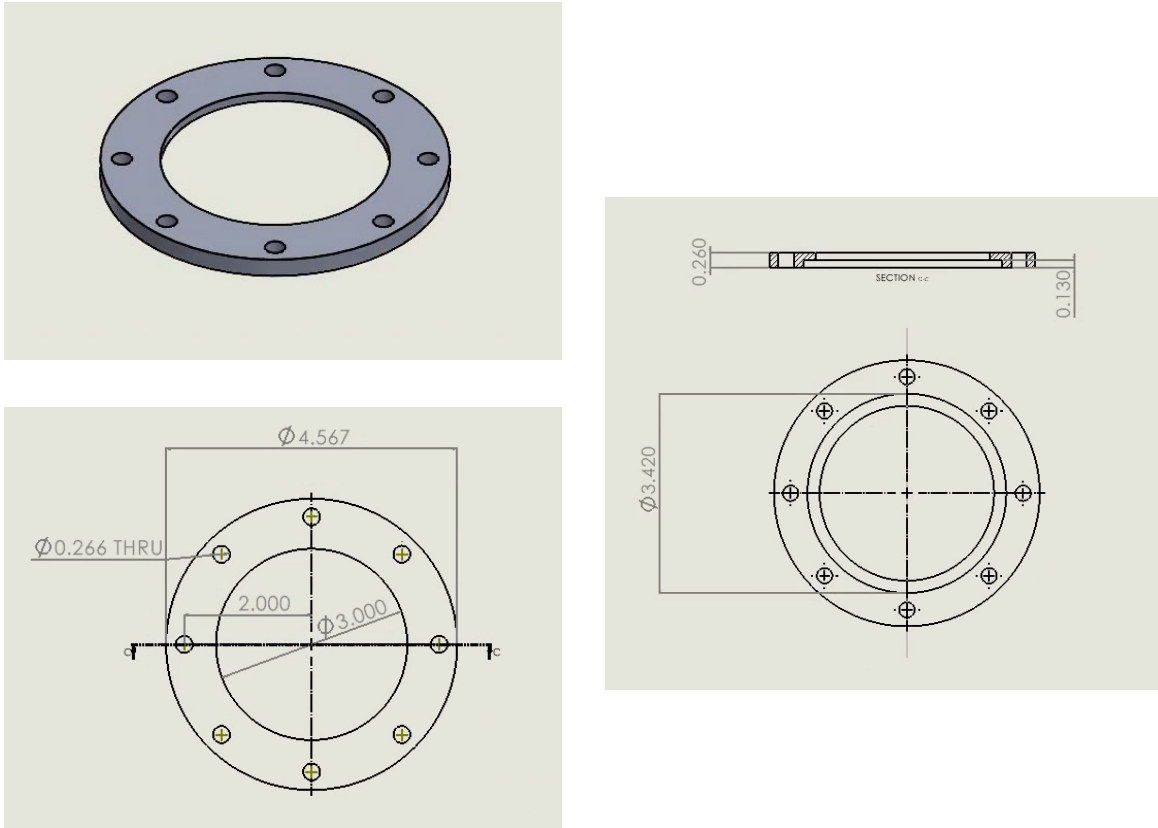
Dimensioned drawing of the brass flange that connects to the base of the MFC. Dimensions in inches.
